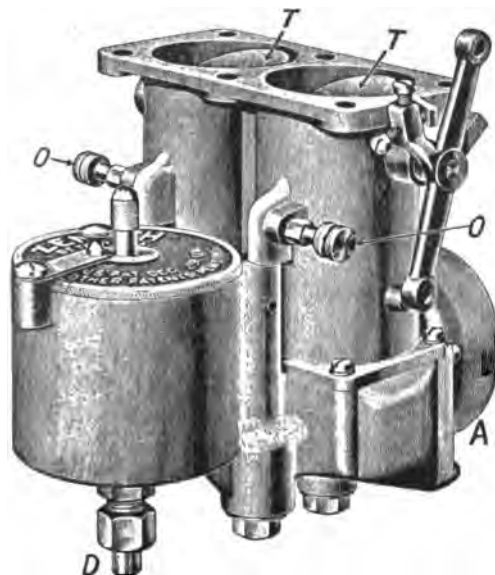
Zenith "Duplex" Carburetor for "V" type engine.
